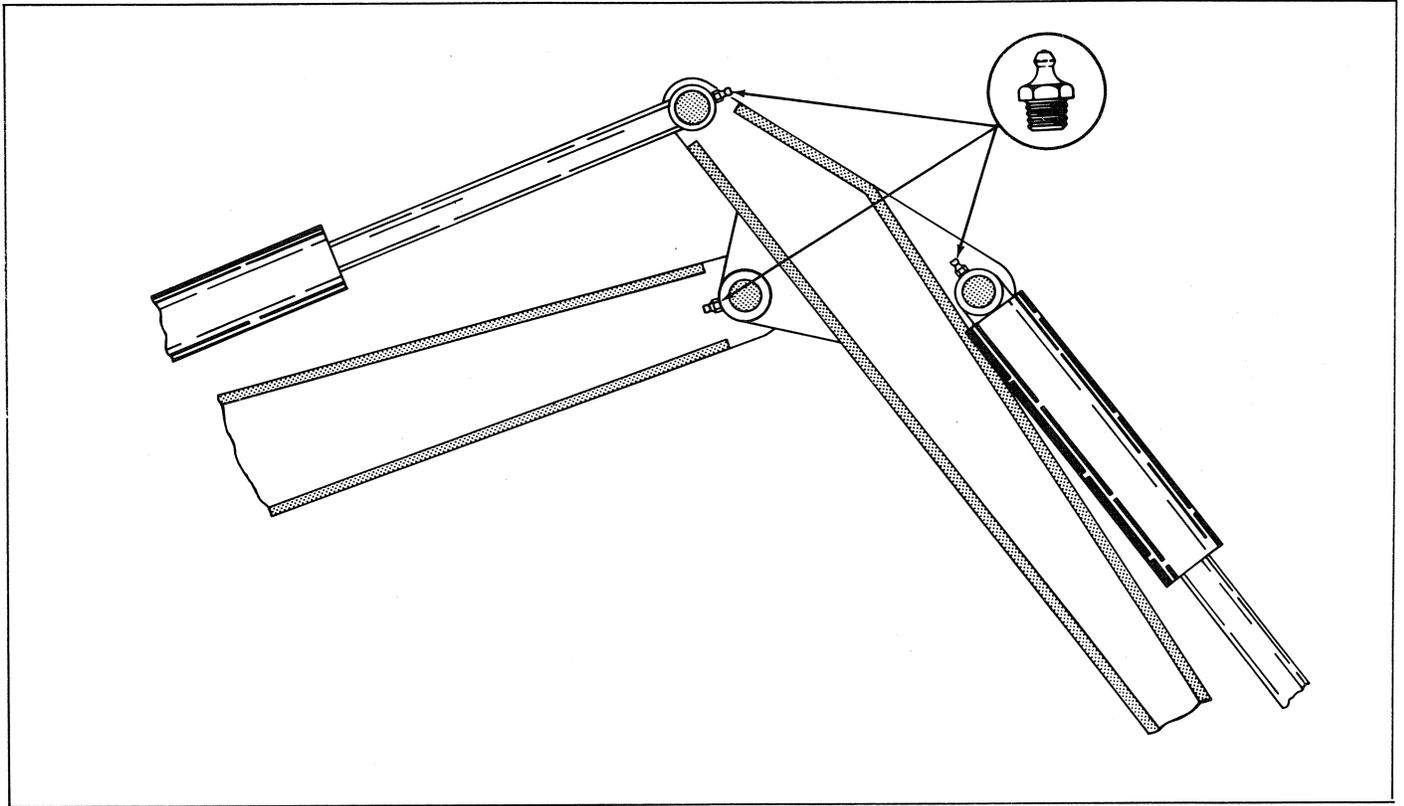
Grease Fitting on Base End of Tool Cylinder, Rod End of Crowd Cylinder and Intermediate to Dipperstick Hinge Pin.
